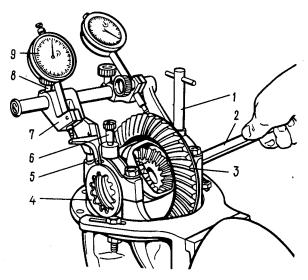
Checking Preload of Differential Case Bearings with Gauge A.95688/R:
